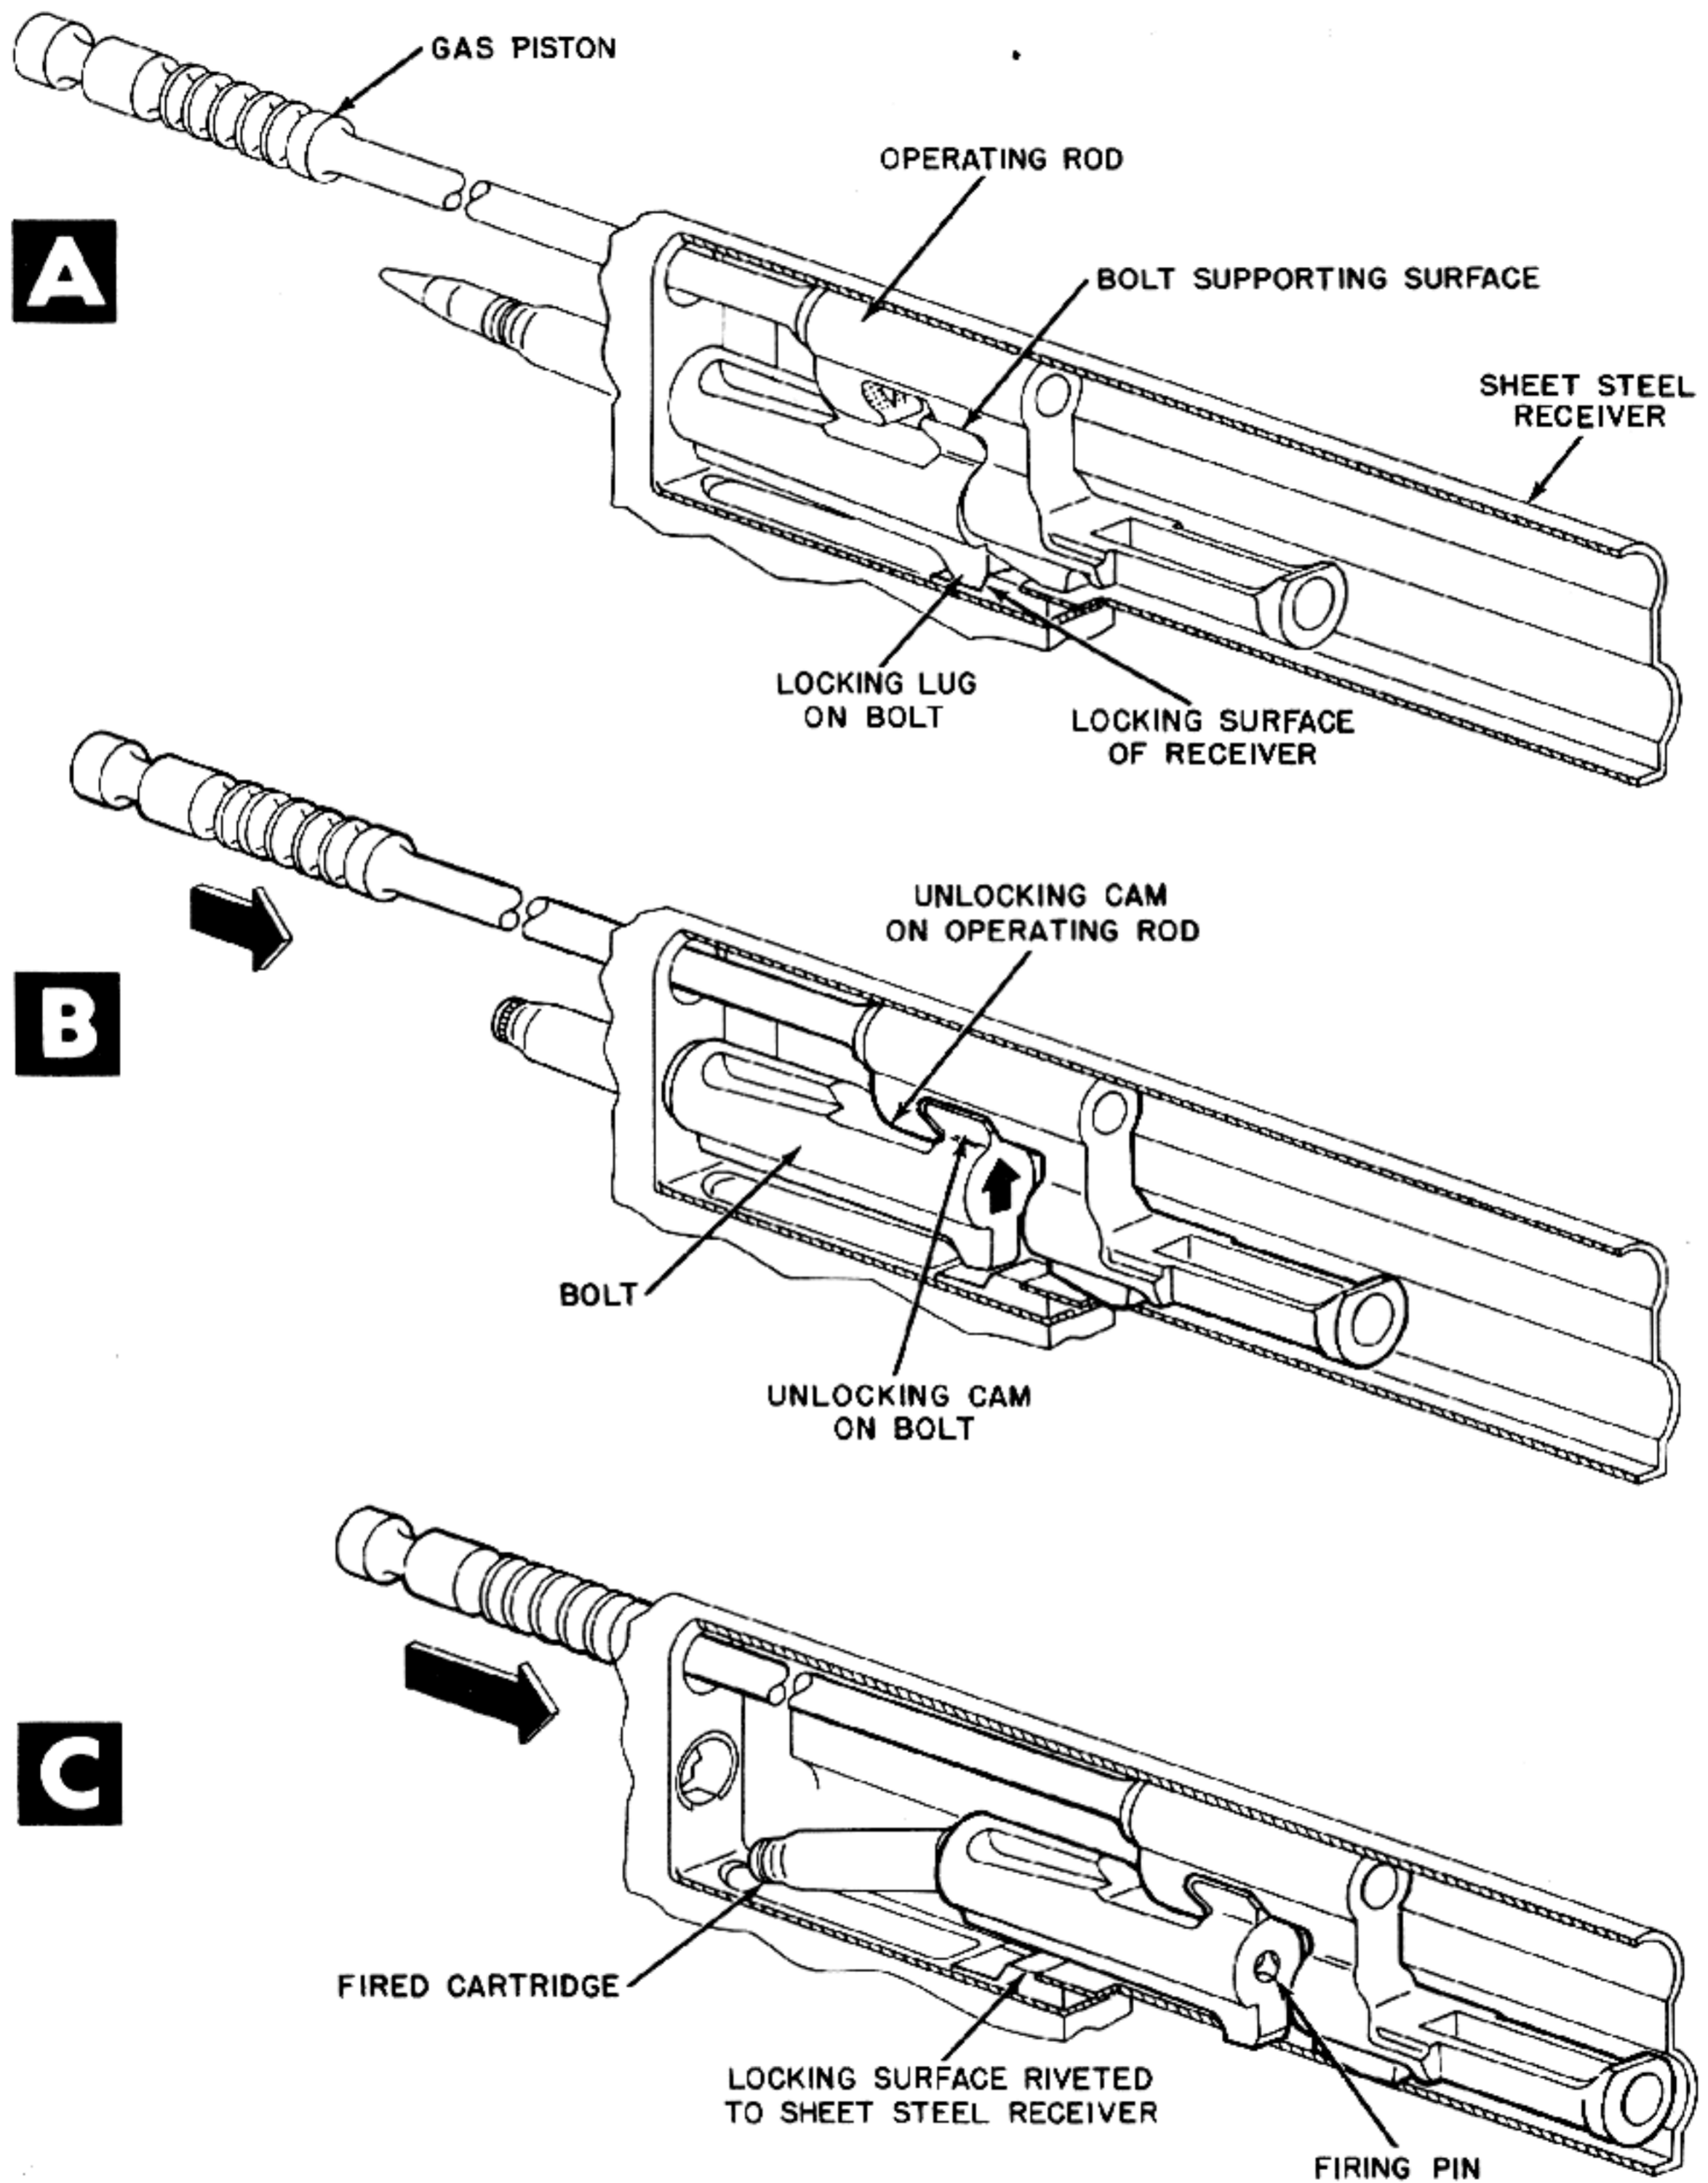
Cam Lug on Operating Rod Lifts Bolt Free of Locking Surface.
